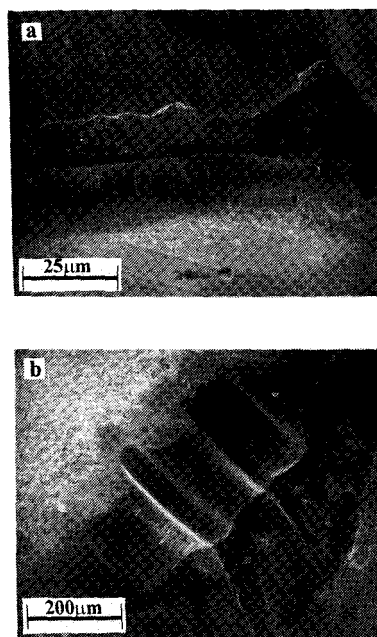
Composite tool after machining high nickel cast iron (BHN 120-150) for a) 2 min. showing rounding off of the cutting edge and b) 20 min. showing grooves both on the rake and the flank. The cutting conditions are speed - 340m/min., feed - 0.1mm/rev and depth of cut - 0.5mm.
